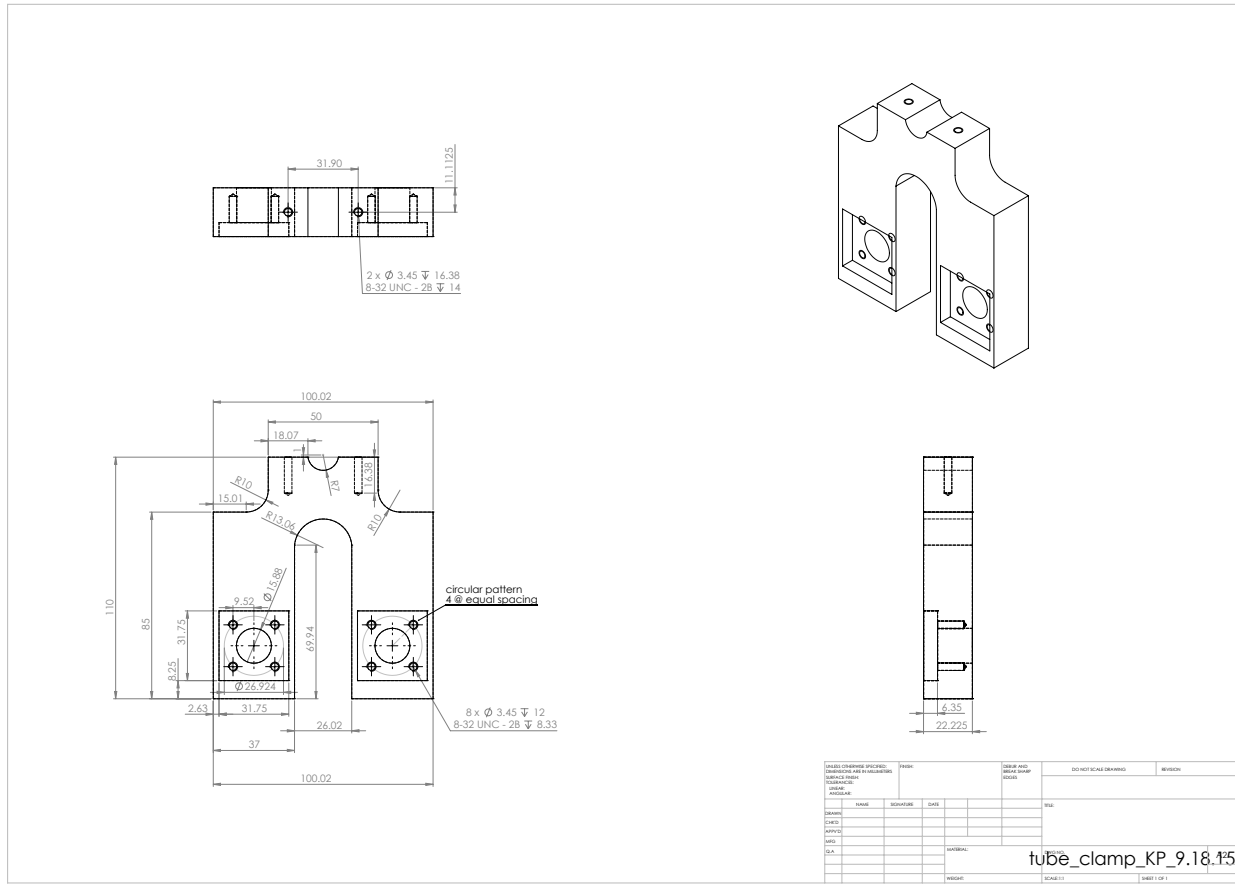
Drawing for tube furnace flange support that is guided by two linear rail systems.
